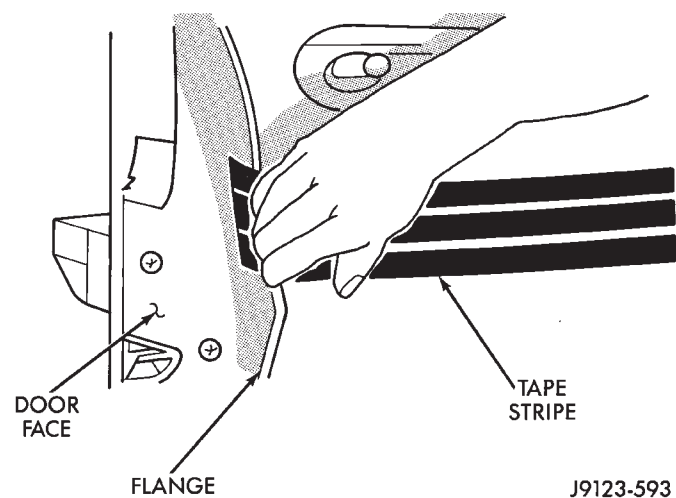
Tape Stripe/Decal Installation On Door Flange
